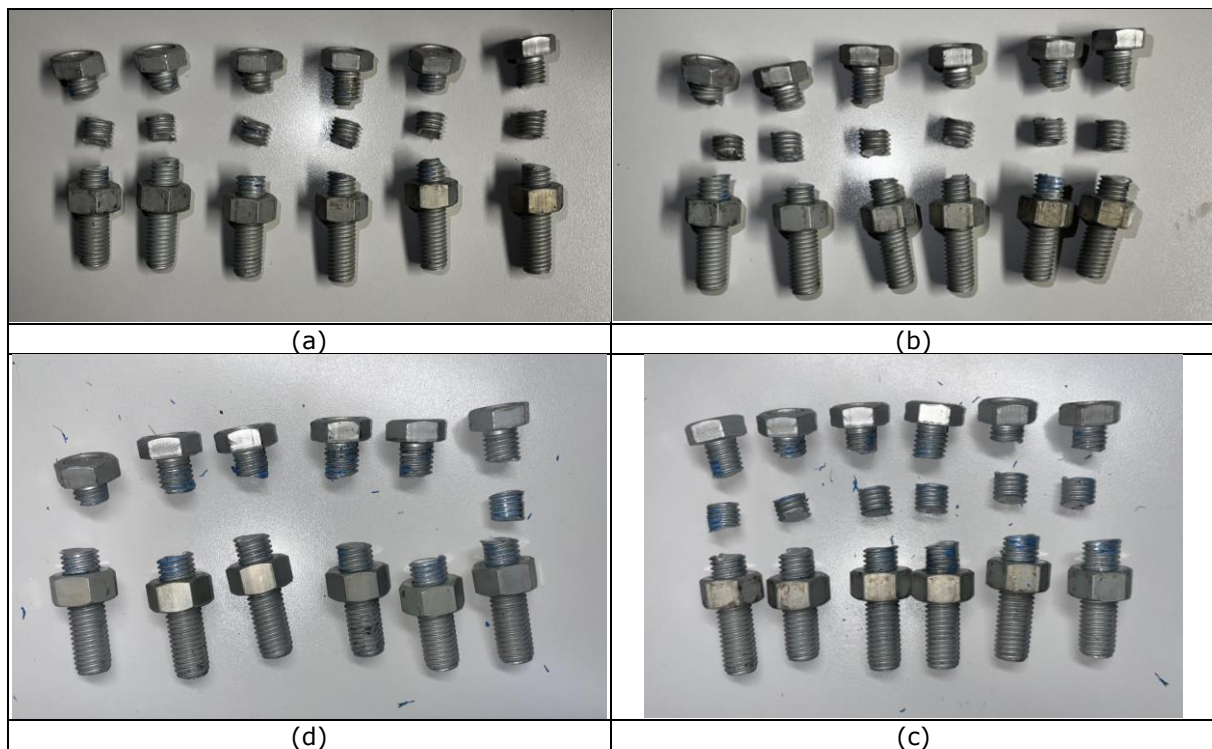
Detail 5 aluminium bolts at failure: (a) tension test; (b) compression test; (c) cyclic test 1; (d) cyclic test 2.
